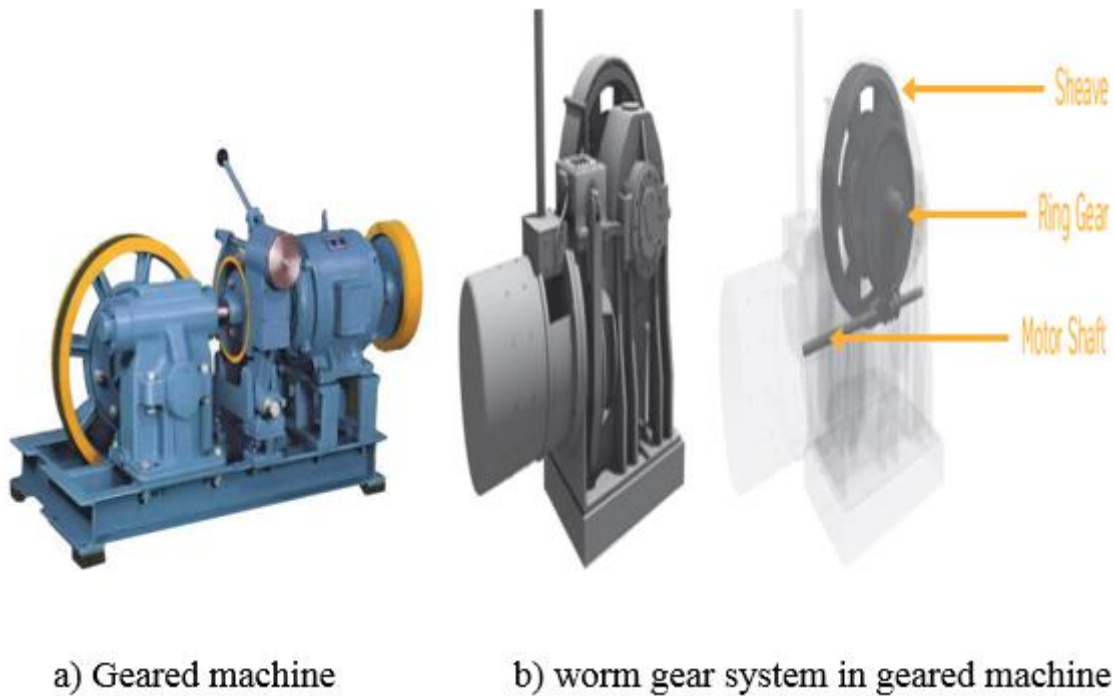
a) geared machine b) worm gear system in geared machine.
